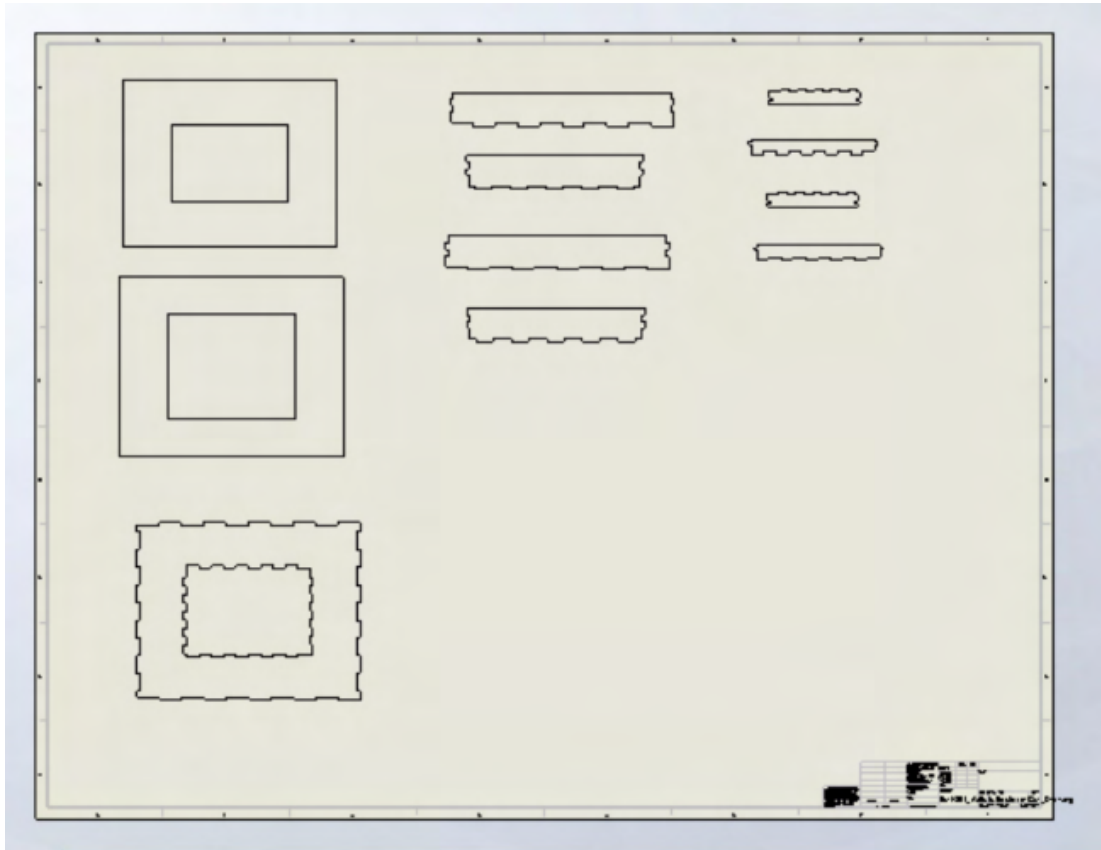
SOLIDWORKS drawing of the box used for the laser cutter.
